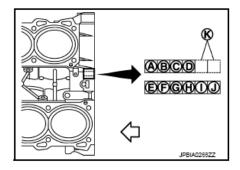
Identifying Cylinder Bore Grade On Cylinder Block Rear Side Courtesy of NISSAN NORTH AMERICA, INC.
